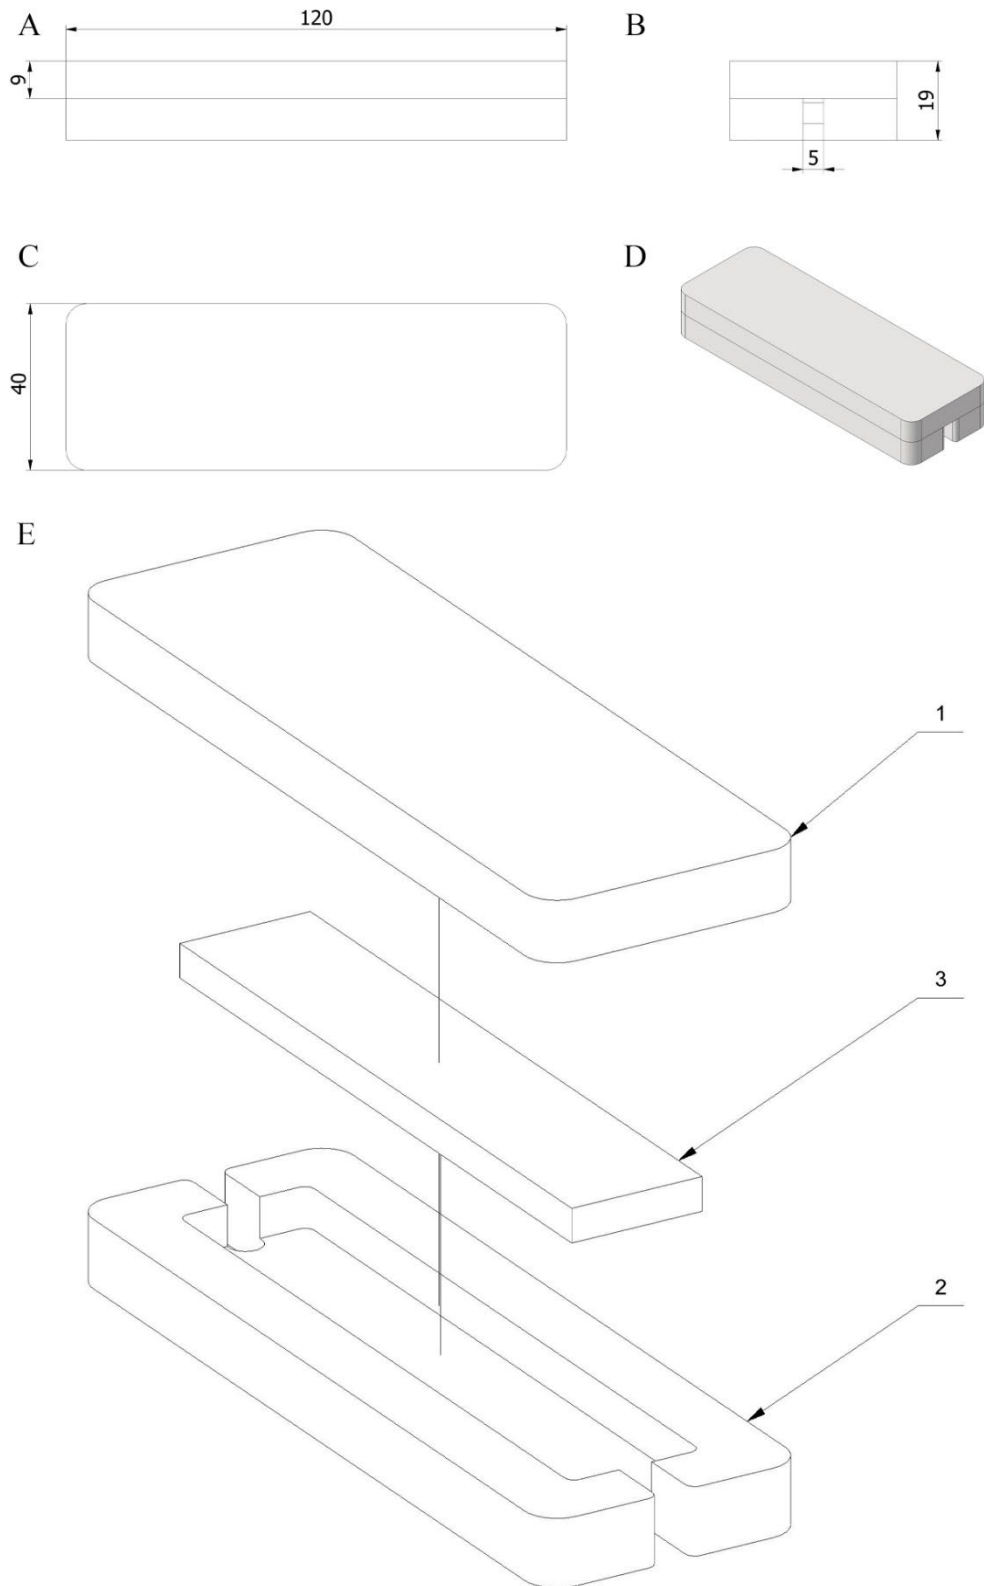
CAD model of a mould for rectangular samples. A) side view. B) front view. C) top view. D) isometric view. E) Exploded view of a rectangular sample mould. Numbers depicted in E are explained in Table 2.7. Numbers 9, 120, 40, 5, 19 in A-C indicate cover height (mm), length (mm), width (mm), resin overflow port width (mm), and height (mm), respectively.
